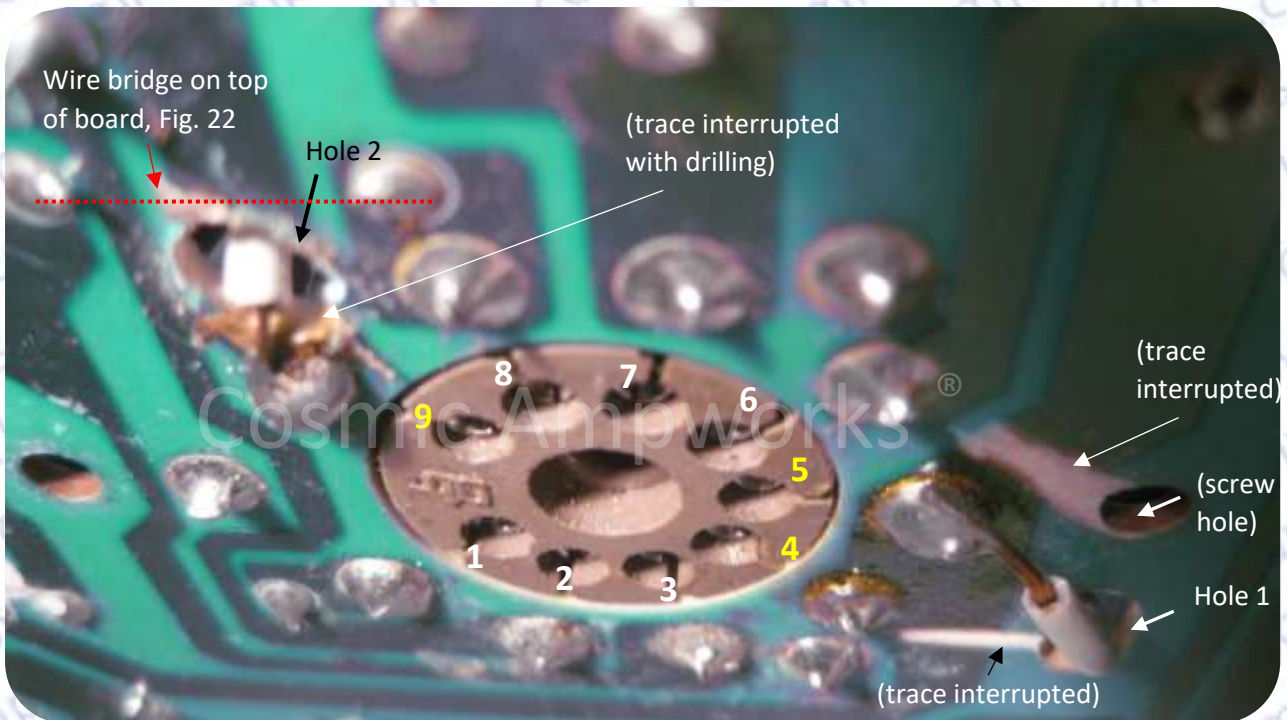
Drill two holes near the second preamp tube: hole 1 right next to the tube socket connections to pins 4 and 5 (Figures 23 and 24); the location is not particularly critical. Drill hole 2 just above the tube socket solder connections of pin 9, but make sure not to accidentally drill through the wire bridge (Figure 22)! Also, interrupt the indicated circuit board traces (the trace near hole 2 can be interrupted when drilling the hole), because the heater traces spread hum throughout the circuit in their stock layout.
